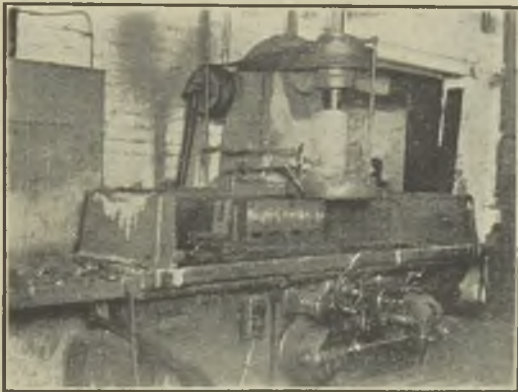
FIRST OPERATION IN MACHINING CYLINDERS.
